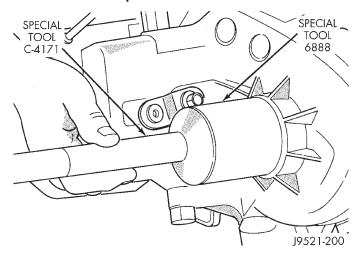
Starting Front Output Shaft Seal Into Case Bore
